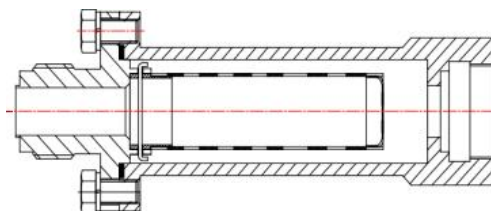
DN4~10 threaded connection turbine flowmeter filter
